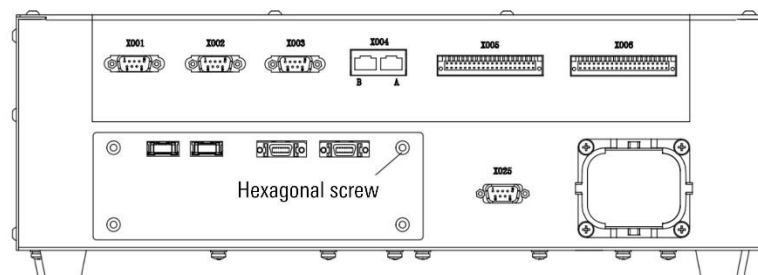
ARCCD20-diagram after installing the gusset plate and fixing the sheet metal
